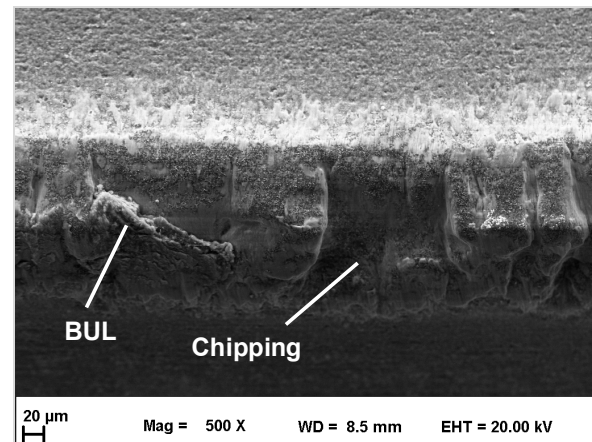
The worn CBN insert. The formation of BUL on the flank face and chipping damage of the cutting edge
